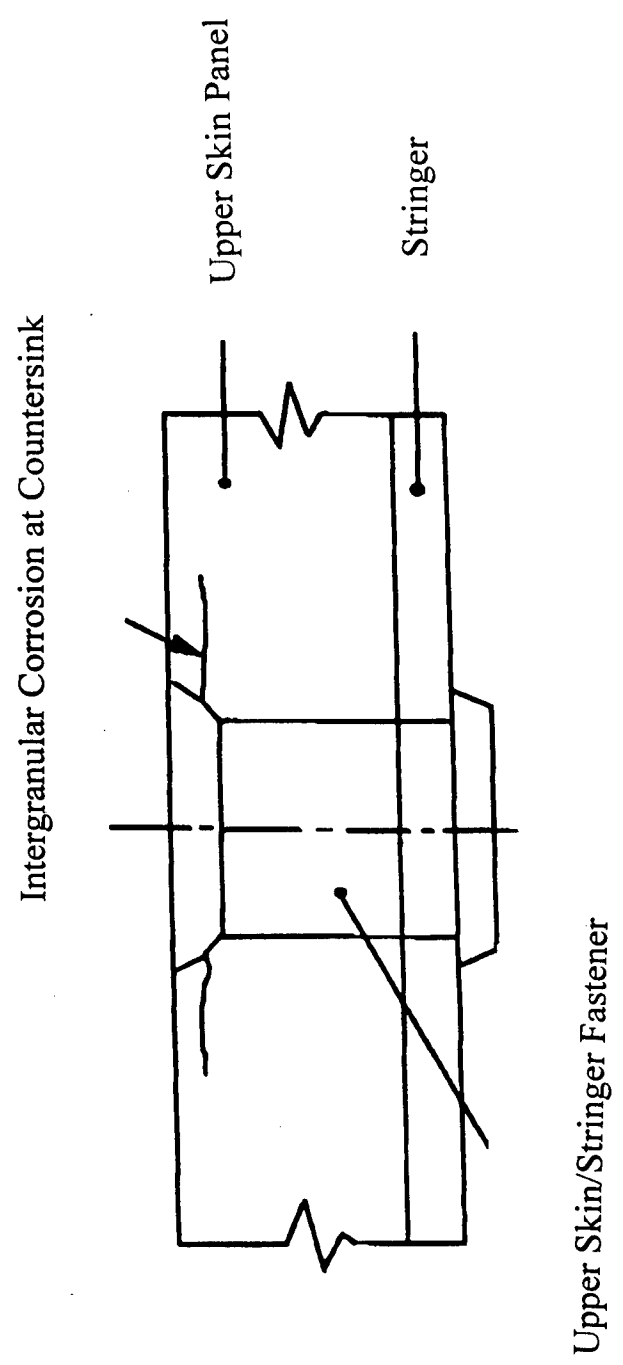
Intergranular Corrosion at the Countersink of Fastener Holes.
